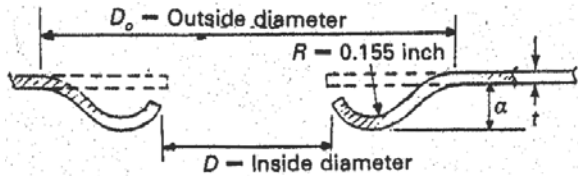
Lightening holes of typical flanged (45° flanged) [12]
